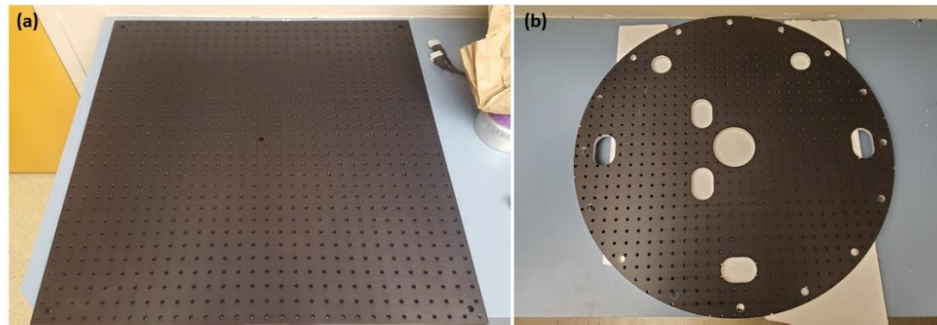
Optics board for FXLT imaging system components. (a) Pre-cut optics board; (b) Cut optics board.
